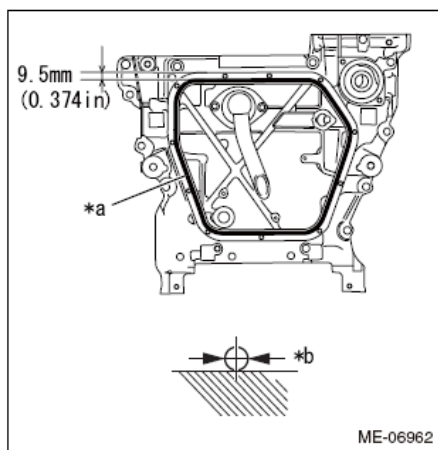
Identifying Oil Pan Sub-Assembly No. 2 Seal Rings
